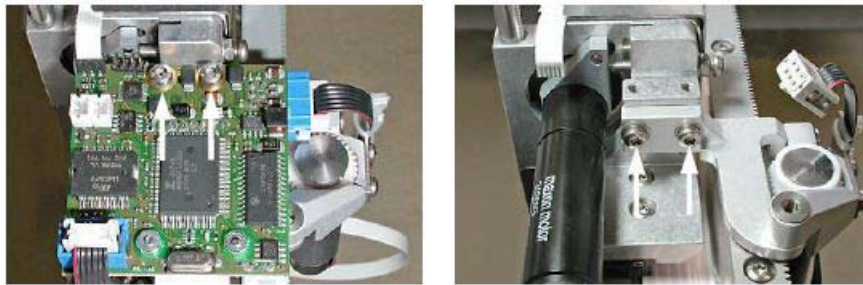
YZ-Board Connectors and Screws (left) and Y-Motor Support with Mounting Screws (right)
